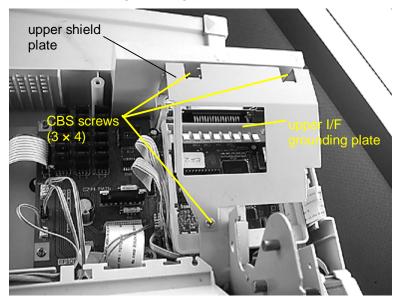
Removing the Upper Shield Plate and Upper I/F Grounding Plate
